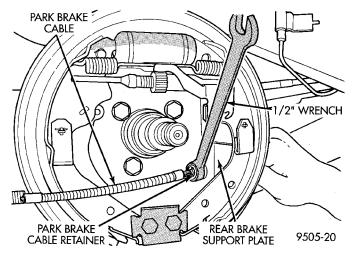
Park Brake Cable Removal From Brake Support Plate
